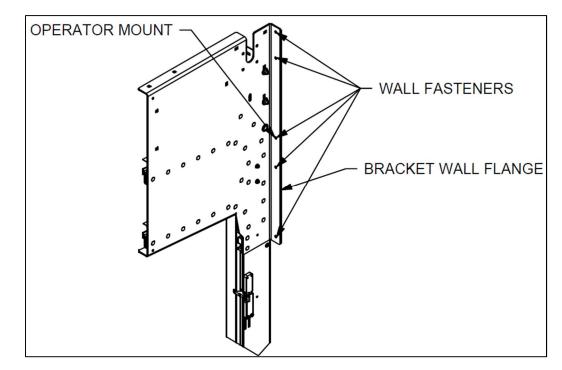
RIGHT HAND BRACKET ASSEMBLY WITH WALL FASTENERS
